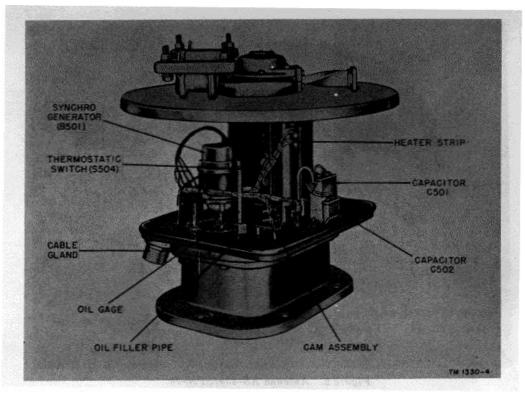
Antenna AS-659/SPN-18, front oblique view with covers removed.
